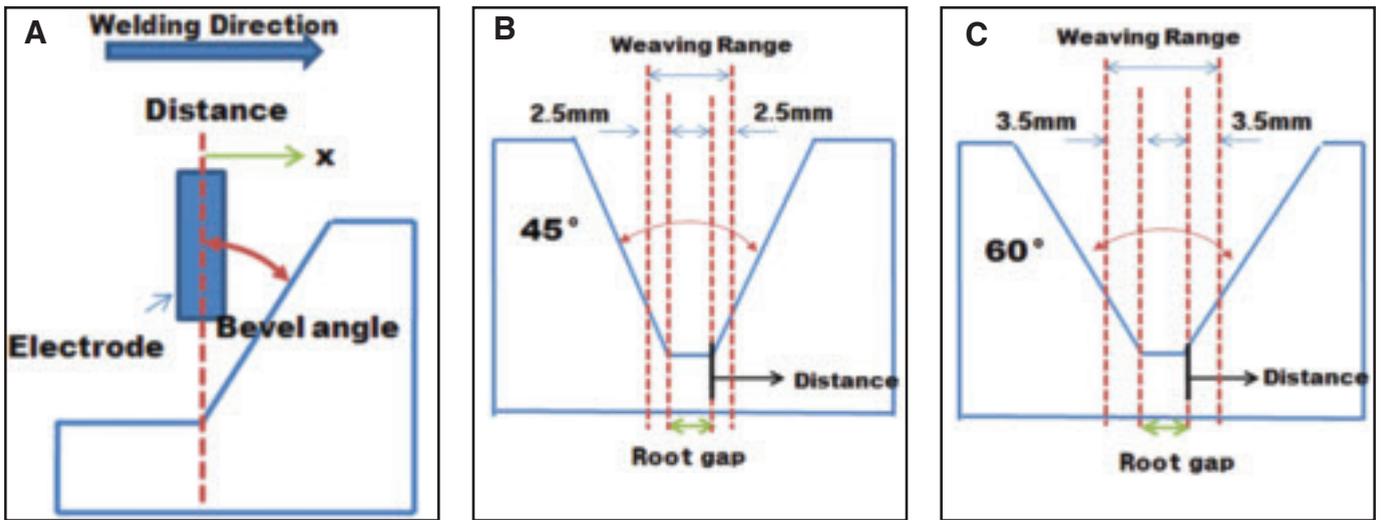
Configuration of single bevel and V-groove workpiece. A — Single bevel; B — groove angle of 45 deg; C — groove angle of 60 deg.
